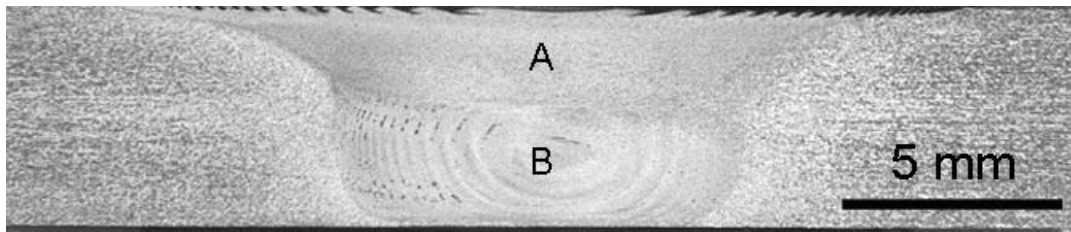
Optical macrograph of the AA2219-T87 friction stir weldment showing the cross-section of nugget.
